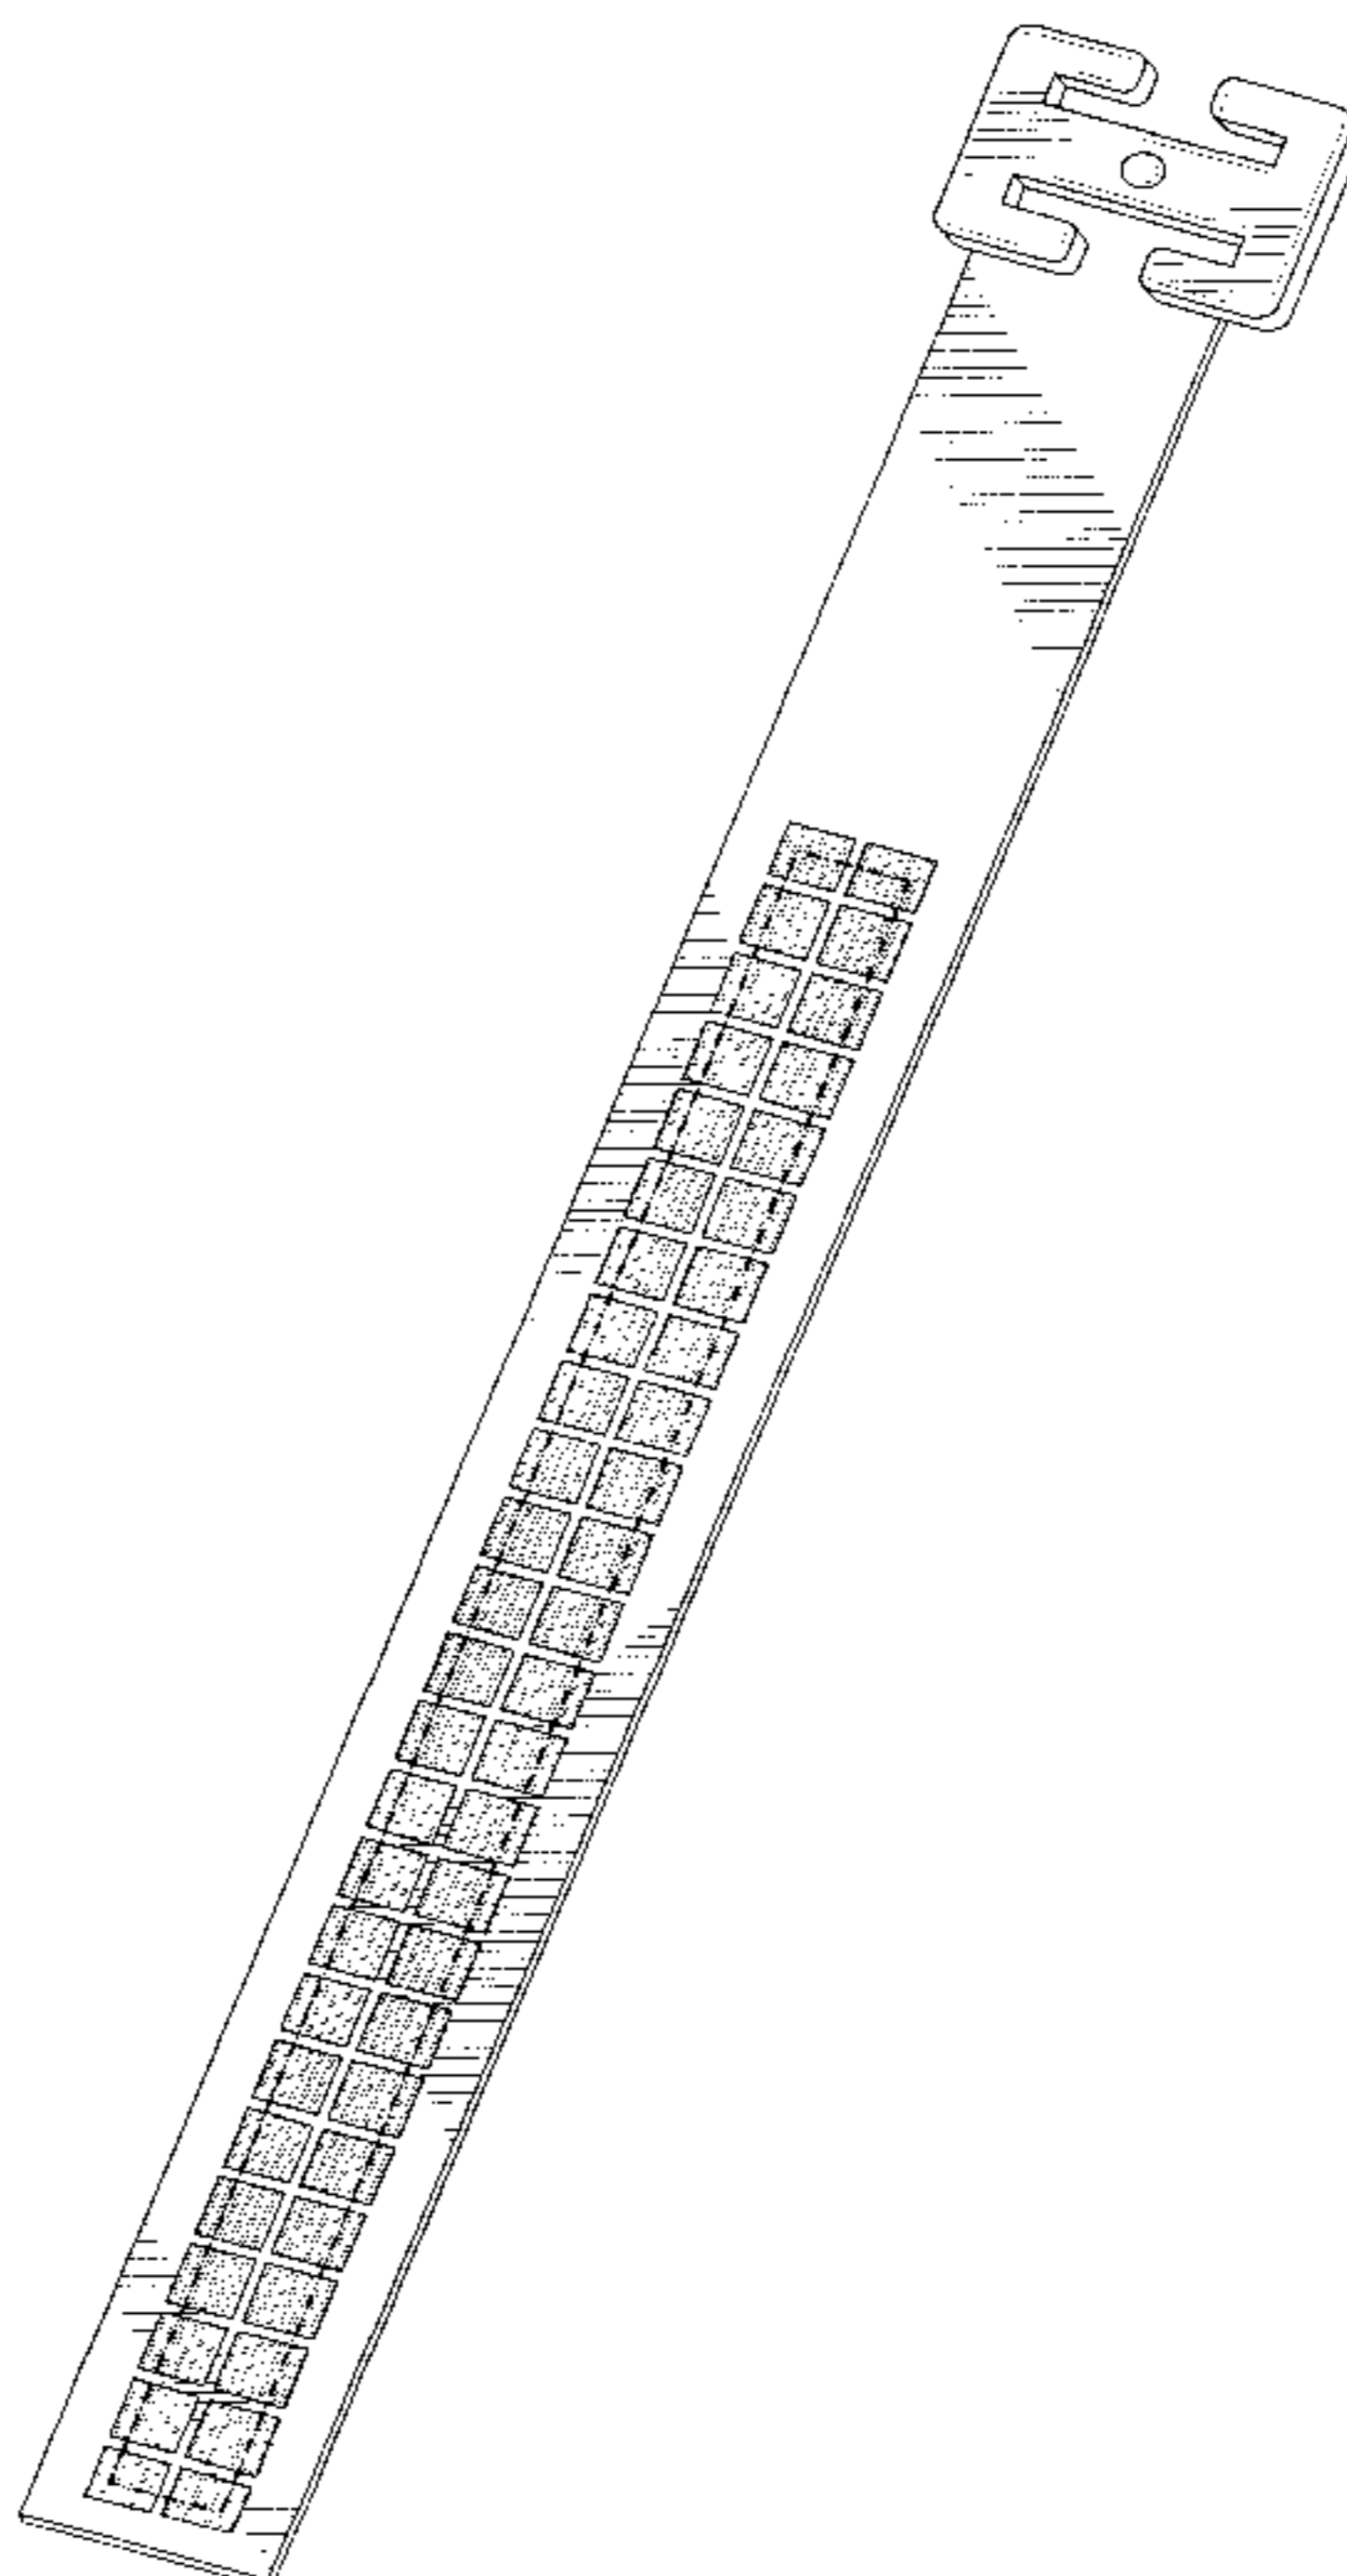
is a top view of a second alternative embodiment of a seat belt positioner with improved fastener array showing my new design, the bottom is disclosed in FIG. 3;
